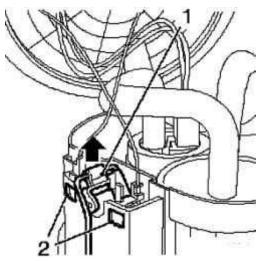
Removing the fuel level sensor: 1 - fuel level sensor, 2 - Holders
